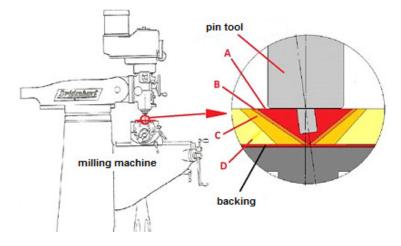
Scheme of the milling machine used for FSW welding with cross-section detail of a top joint
